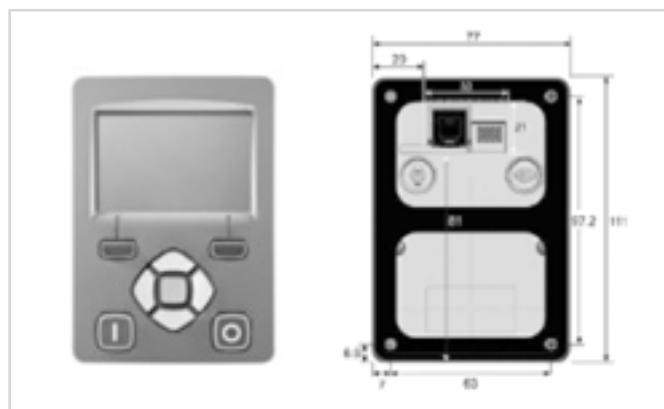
Front and rear view of the control panel with fixing holes and recess on the back (for external mounting to the switch cabinet)
